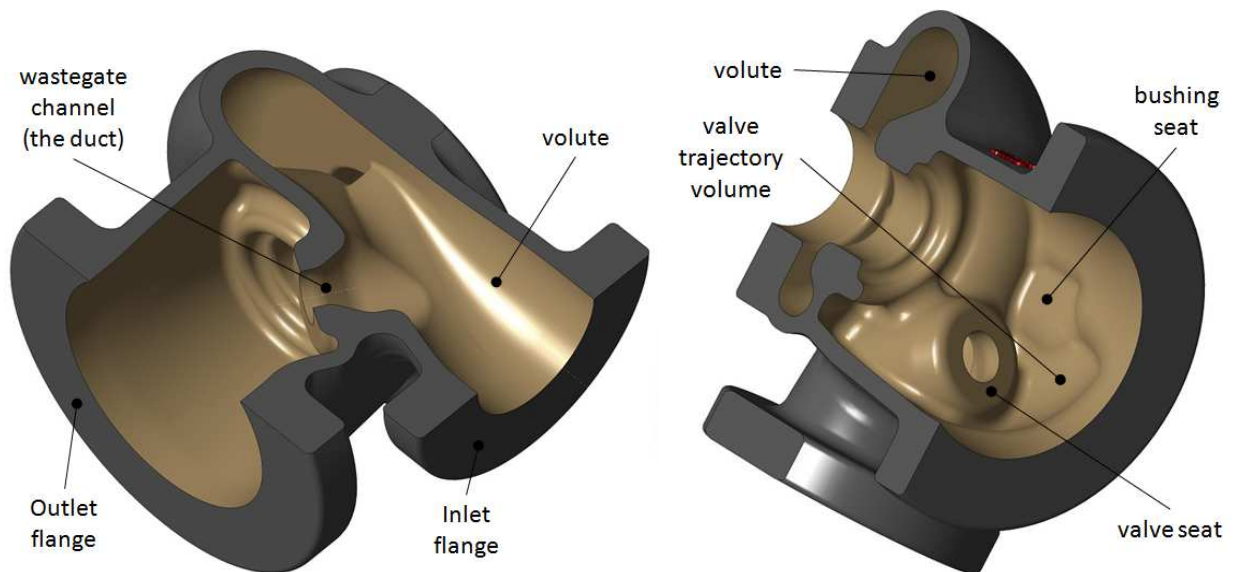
Section view through wastegate channel (left) and turbine wheel axis (Y-axis) (right)
